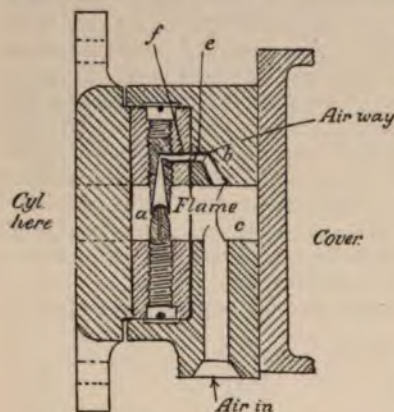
Wittig & Hees Engine—Ignition Valve (Sectional Plan).
